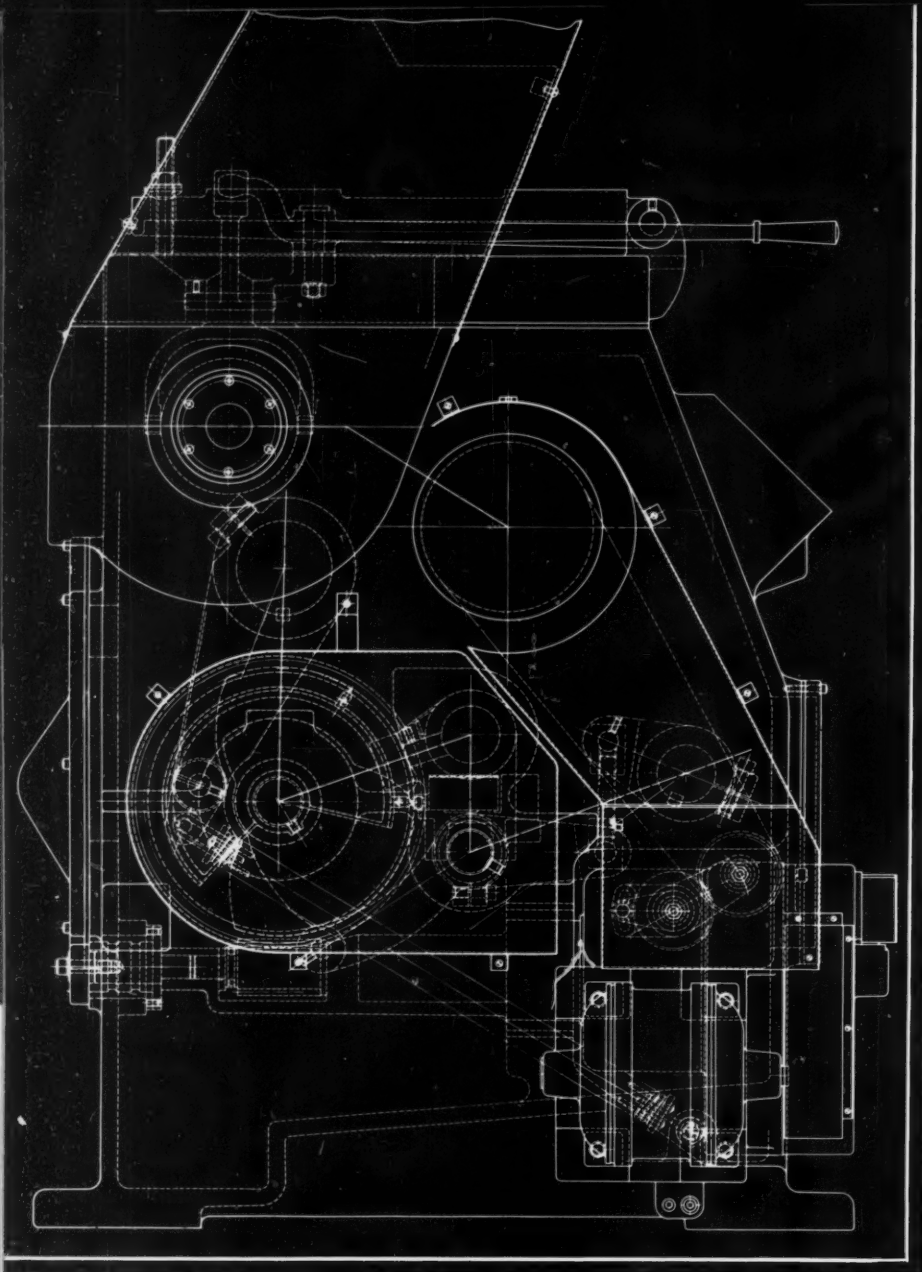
View of head end shows the position of all support bars, camshaft and feed box. Feed box drive motor is shown at the lower right
